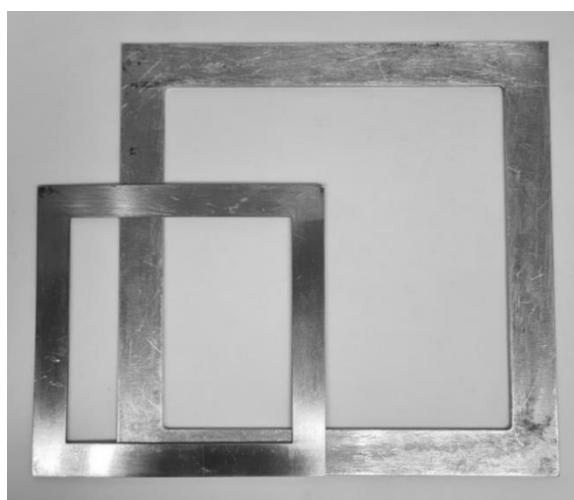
ALUMINIUM FRAMES FOR COMPRESSION MOULDING
